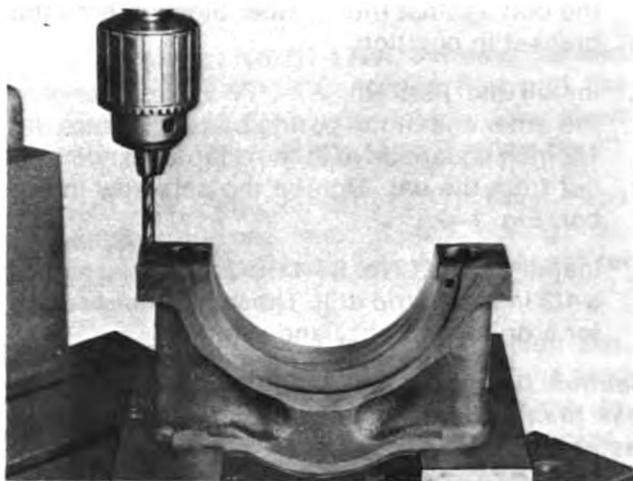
Drill The Dowel Hole In The Rear Main Bearing Cap.
